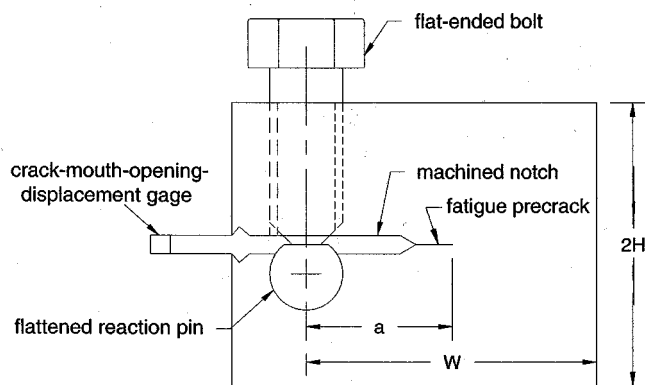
Typical Test Arrangement for Constant Displacement K_{IEAC} Tests with Modified Bolt-Load Compact Specimen; $H/W = 0.486$
